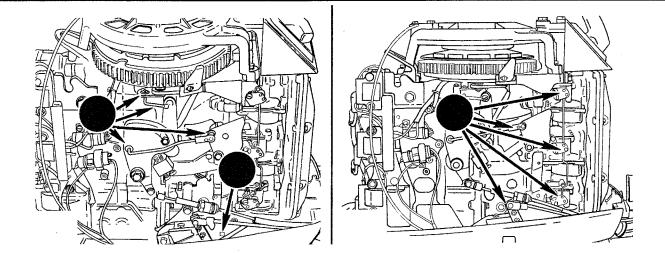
Shift shaft and linkage and control lever bearing (left) along with shift and throttle cable fittings, carburetor linkage and cam follower (right) lubrication points for 65RS, 65WR and some 50-70TTL models of the (913cc) 3-cylinder, 2-stroke motor
